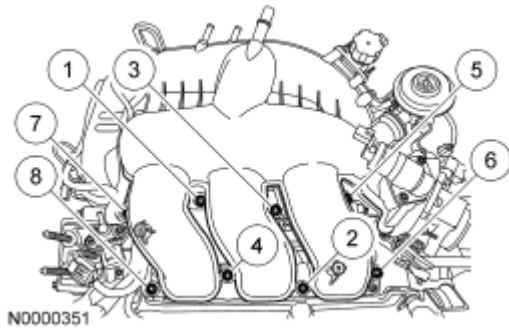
Identifying Tightening Sequence Of Upper Intake Manifold Bolts
